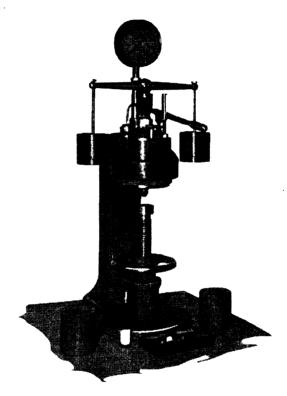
Brinnell Hardness Machine (Courtesy of: Detroit Testing Machine Co.)
